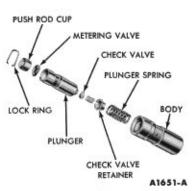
Typical Hydraulic Valve Lifter Assembly
